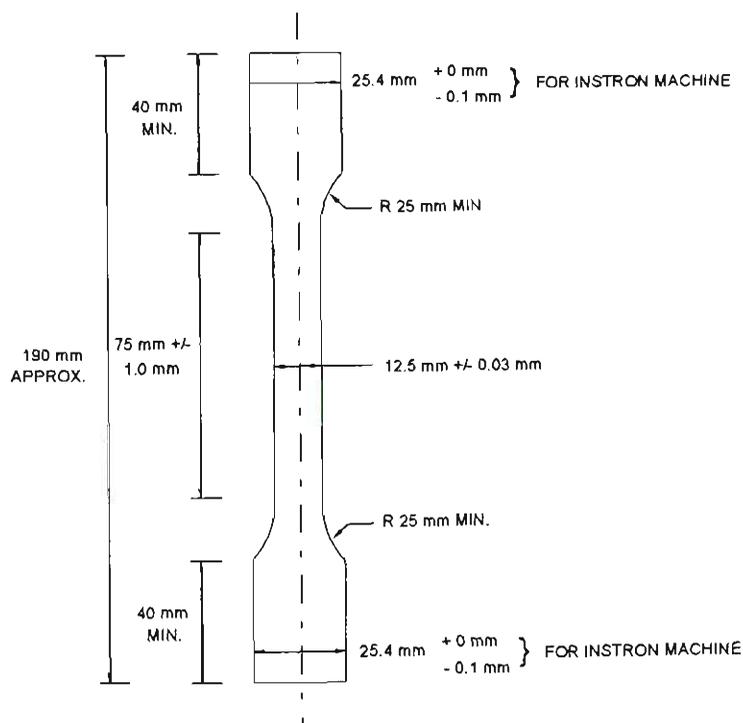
Standard B-34 Tensile Coupon Test Specimen
